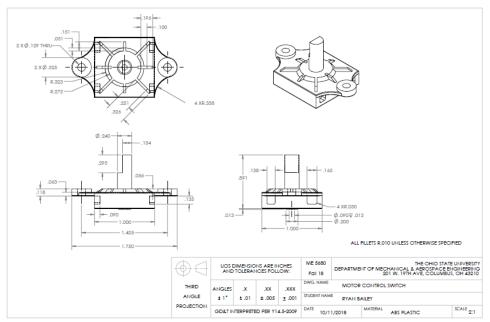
Detailed part drawing of the "Motor Control Switch" RL BOM # 2 & SW BOM # 3  $\,$
